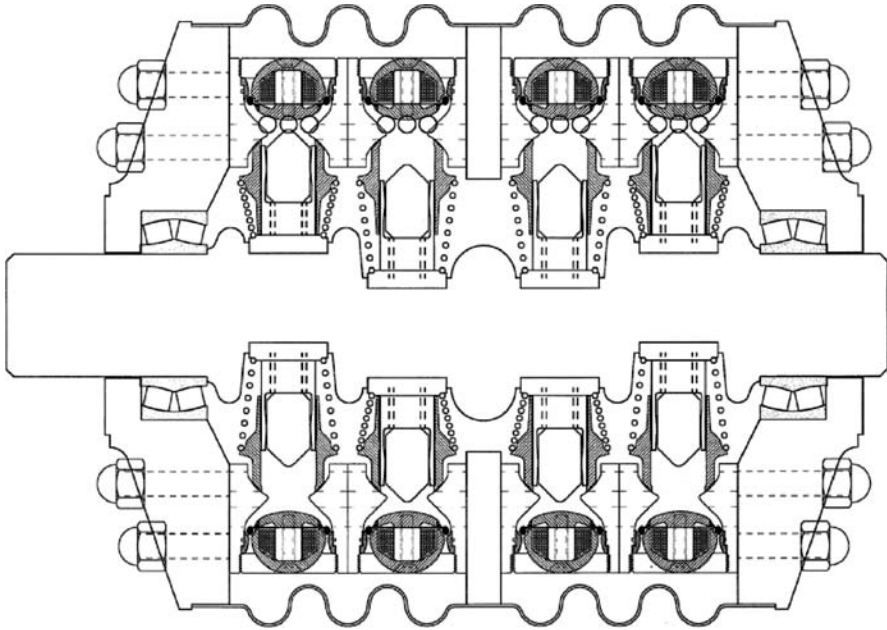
A four-layer active-valve radial-piston machine. From Salter et al (2002)
